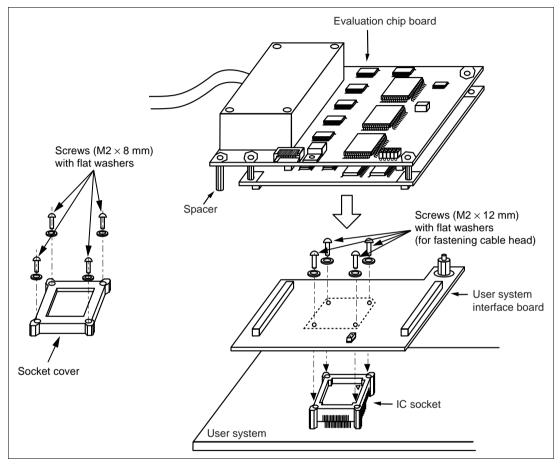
User System Interface Board for the H8SX/1653 TFP-120 Package
